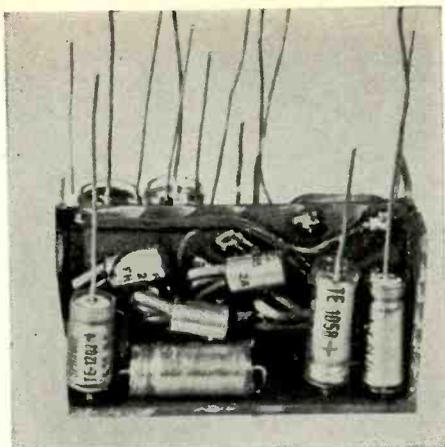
View of the right side of the amplifier after all parts have been installed.
